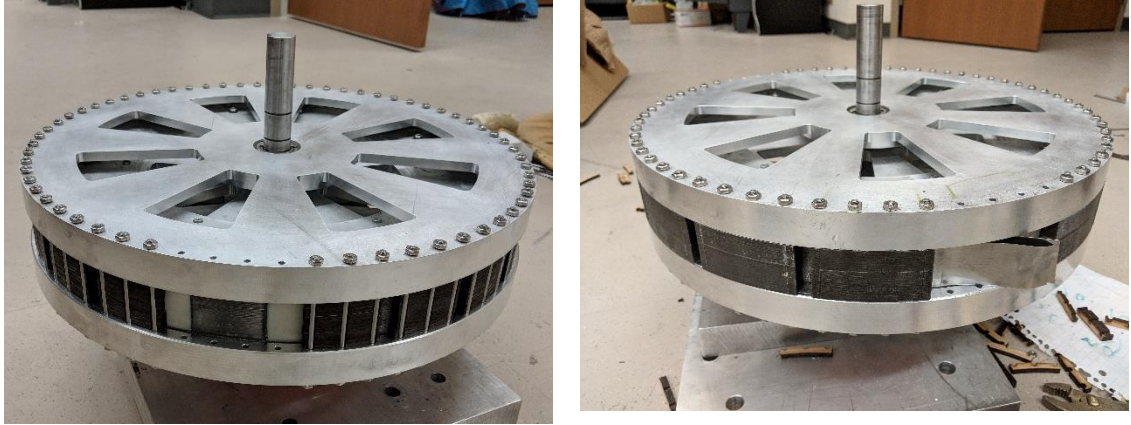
Cage rotor assembly process, Second stage of the MSMG design.
